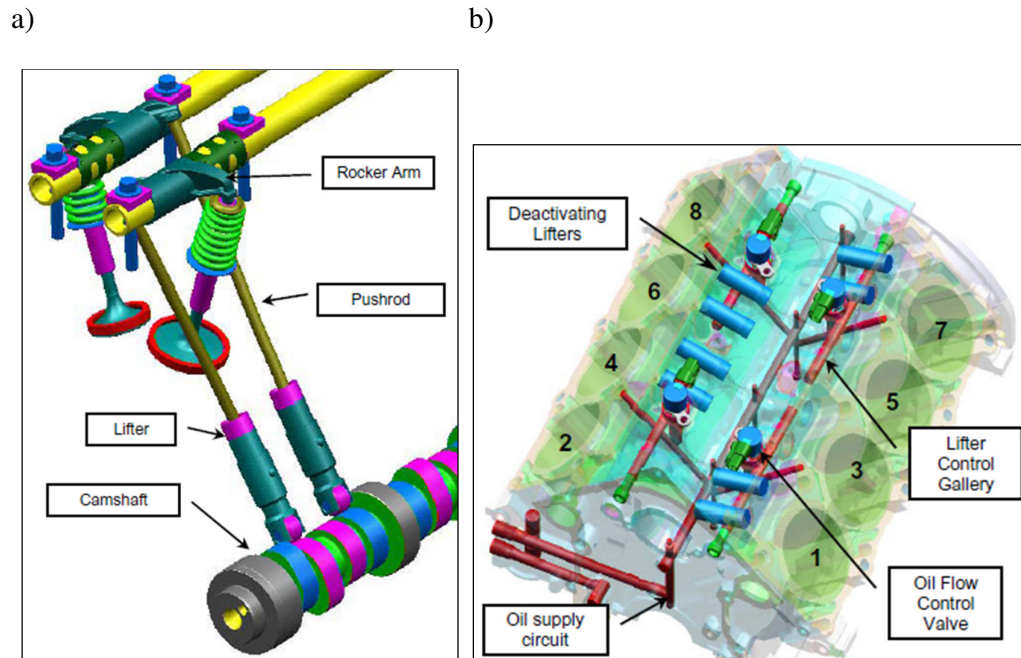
a) The lifter mechanism implemented on pushrod to disconnect cam shaft motion from rocker arm and so from the valve, b) Extra oil channels inside the engine block showing how the lifter mechanism functions [13].
